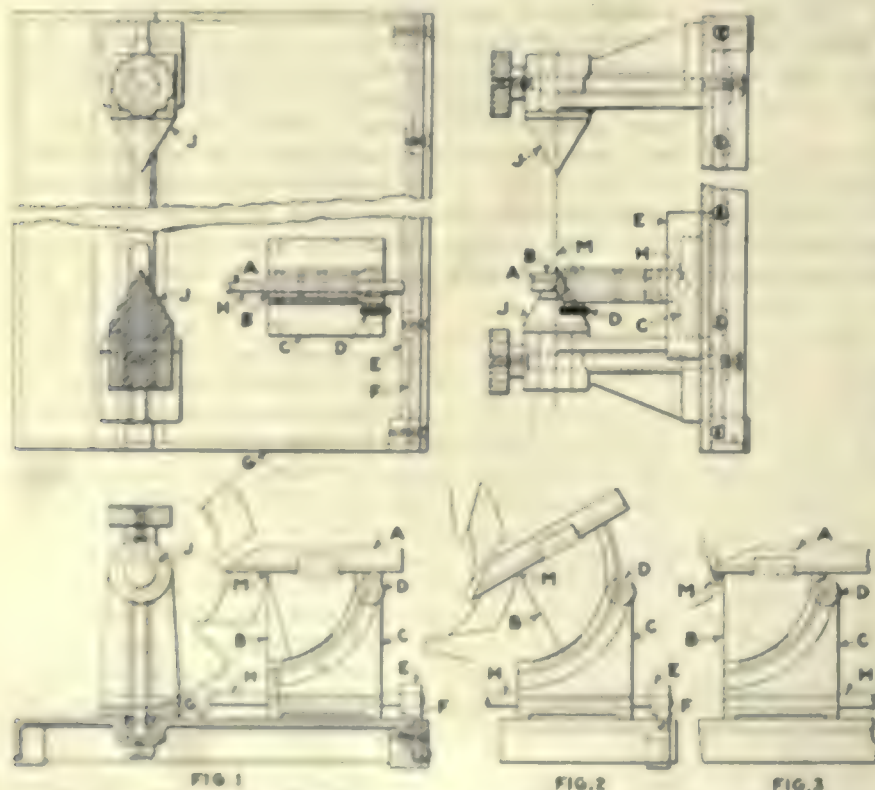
GAGE WITH PROTRACTOR SET FOR INDICATING A RADIAL TOOTH FACE ON A TOOL 1 IN. IN DIAMETER. FIG. 2—PROTRACTOR SET FOR A HOOKED TOOTH. FIG. 3—PROTRACTOR SET FOR A SMALL TOOL WITH RADIAL TOOTH FACE
